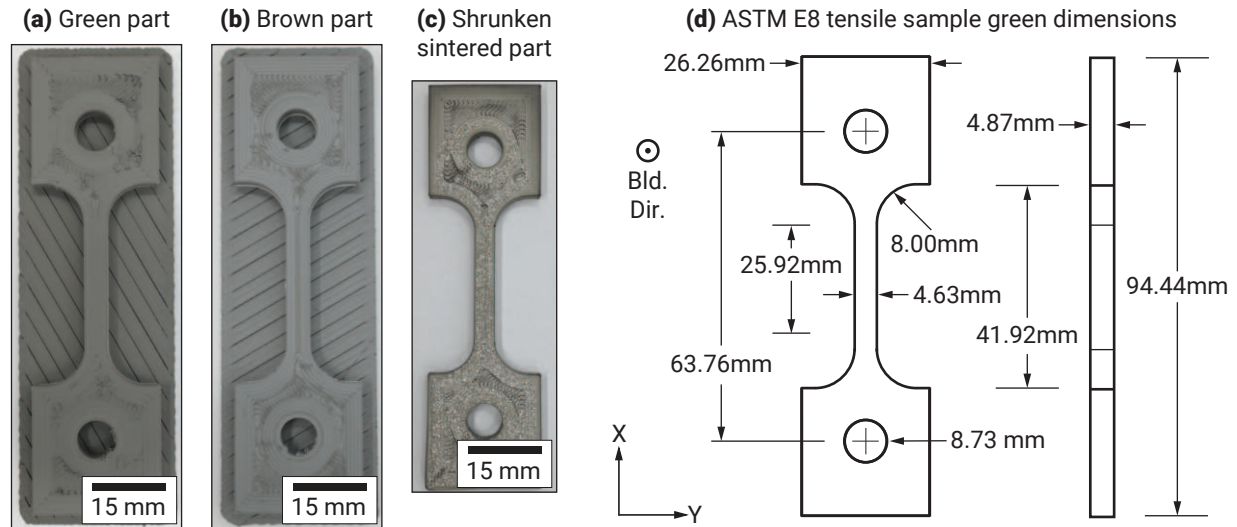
(a)–(c) Images of the green, brown and sintered parts and (d), the tensile specimen green part dimensions. The sheet samples were cut using the average sintered part dimensions of the BMD samples rather than the green part dimensions so that they matched the reduced size of the sintered parts as closely as possible.
